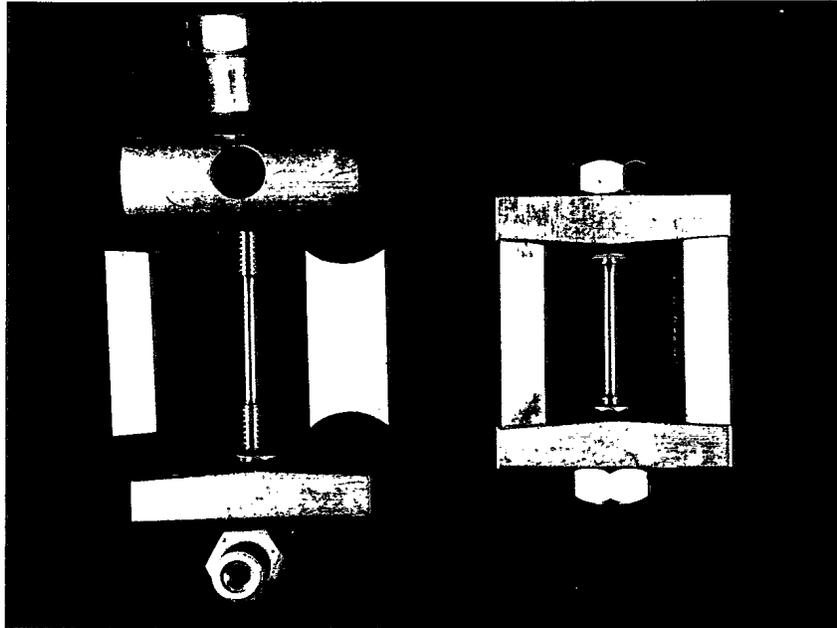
Exploded view of the components of the stressing frame, including the specimen, and the final stressed assembly.
